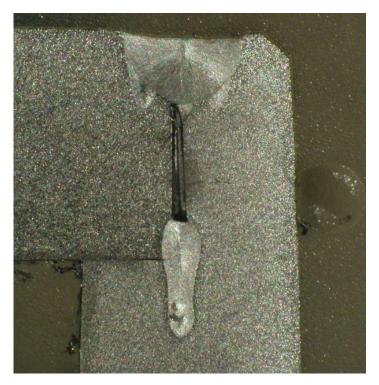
Cross-section of a corner of the distillation chamber (end point). The wide, semicircular weld at the top was achieved with an oscillating laser beam. The deep, narrow weld without oscillation. Welding was performed in two separate stages.
